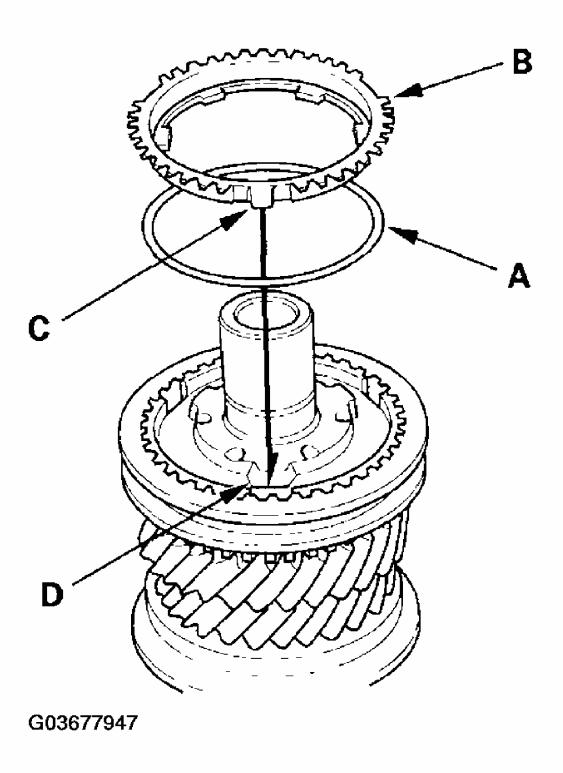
Installing Synchro Spring Courtesy of AMERICAN HONDA MOTOR CO., INC.
